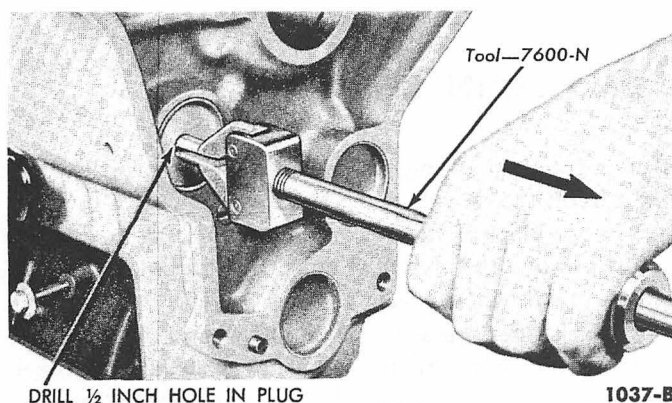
Camshaft Rear Bearing Bore Plug Removal
